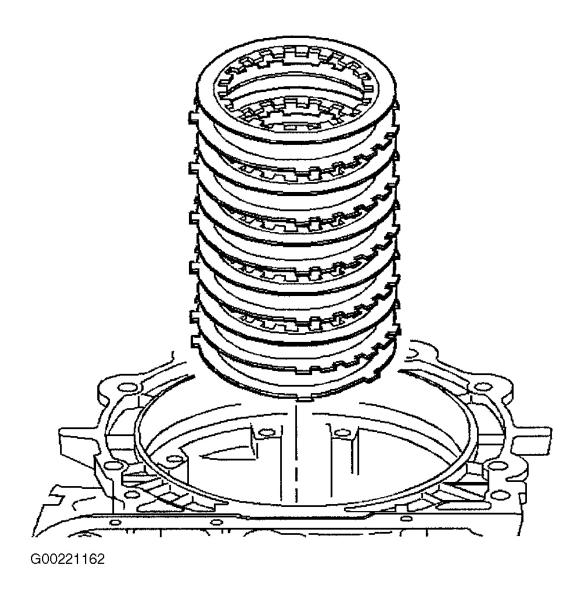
Removing/Installing Low Reverse Clutch Plates Courtesy of GENERAL MOTORS CORP.
